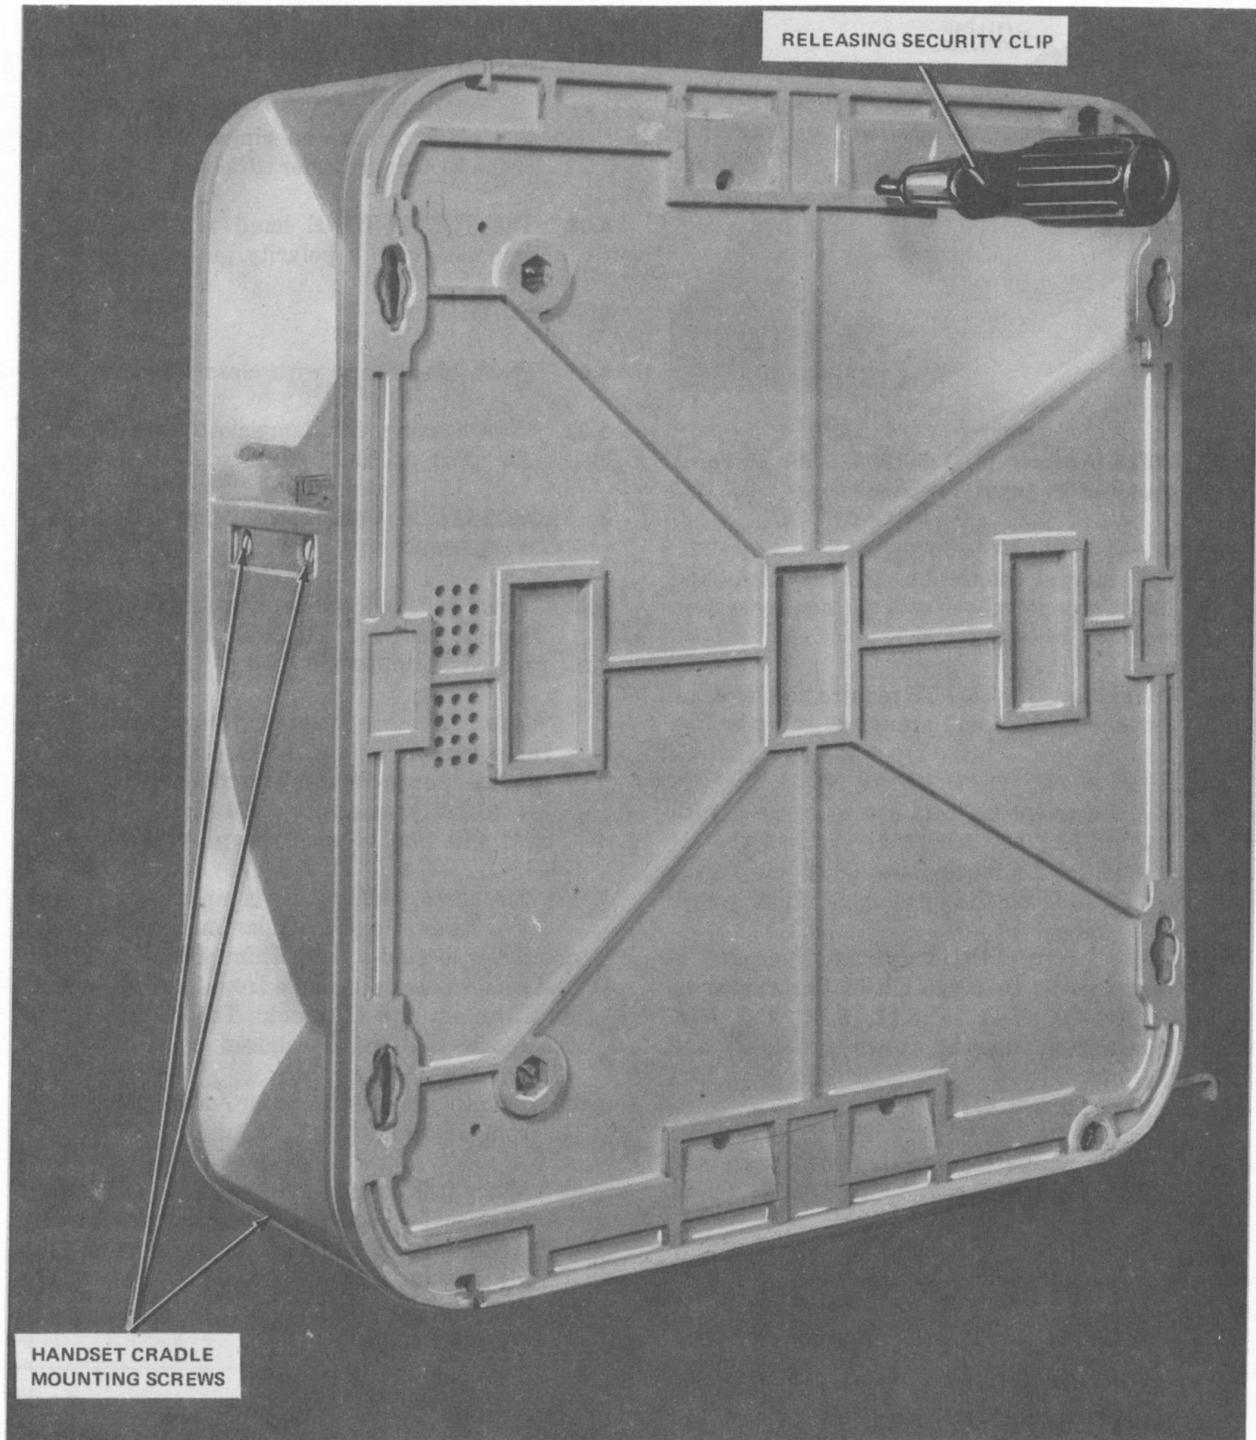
950A- or 2950A-Type Telephone Set With Front Panel and Frame Removed
